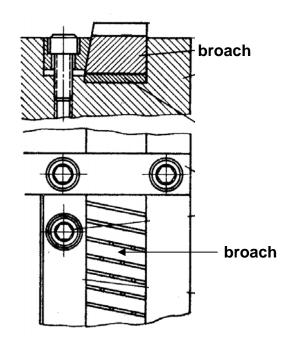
Mounting external broach for surfacing and slotting.
